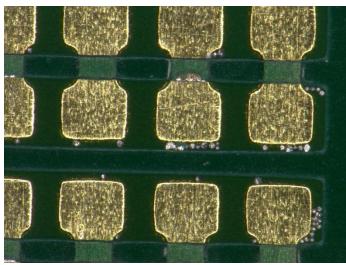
Solder Balls Wedged Due to Wiping Before Cleaning
